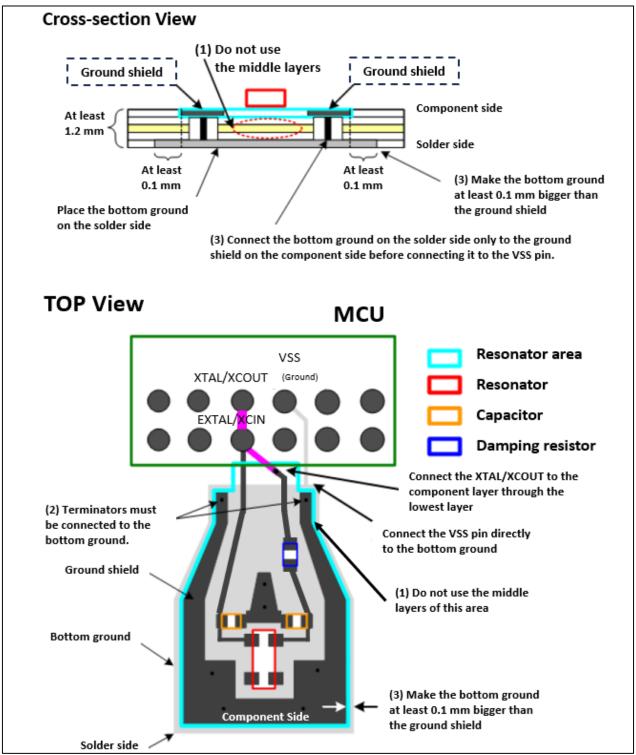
Routing example for a multilayered board thicker than 1.2 mm: LGA/BGA Package (VSS is placed in the inner column)
